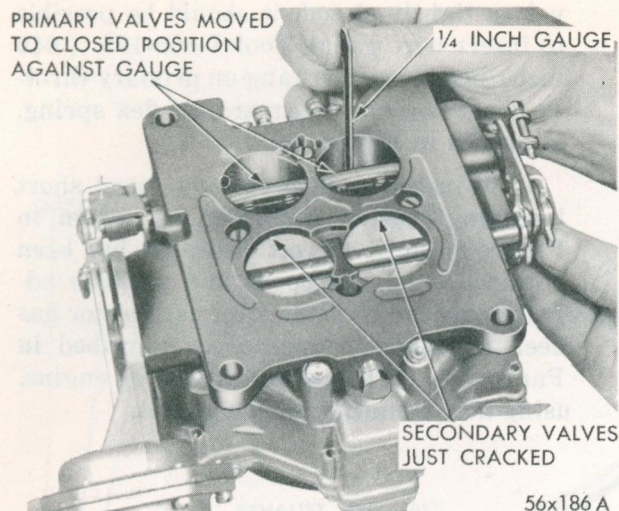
Checking Opening of Secondary Throttle Valves (Step 2)
